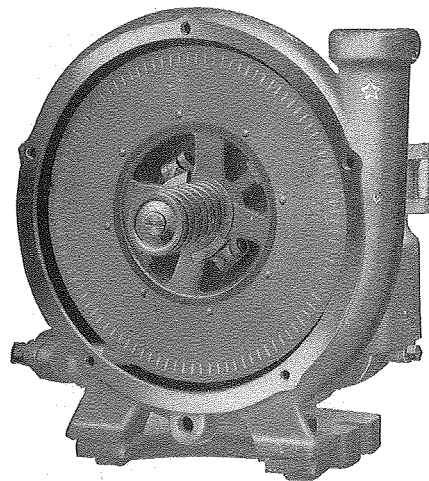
Turbine Cap Removed, Showing Wheel, Governor and Nozzle
